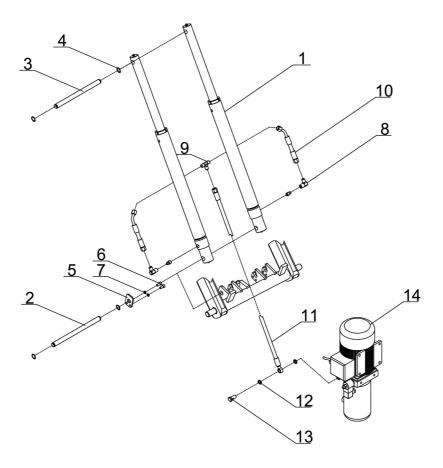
Spare parts drawing 3 - FHT-B 1200
